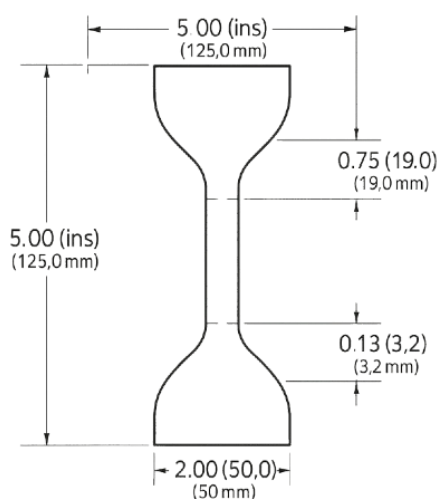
ASTM D638 Type IV Tensile Test Specimen Dimensions and schematic [1].
